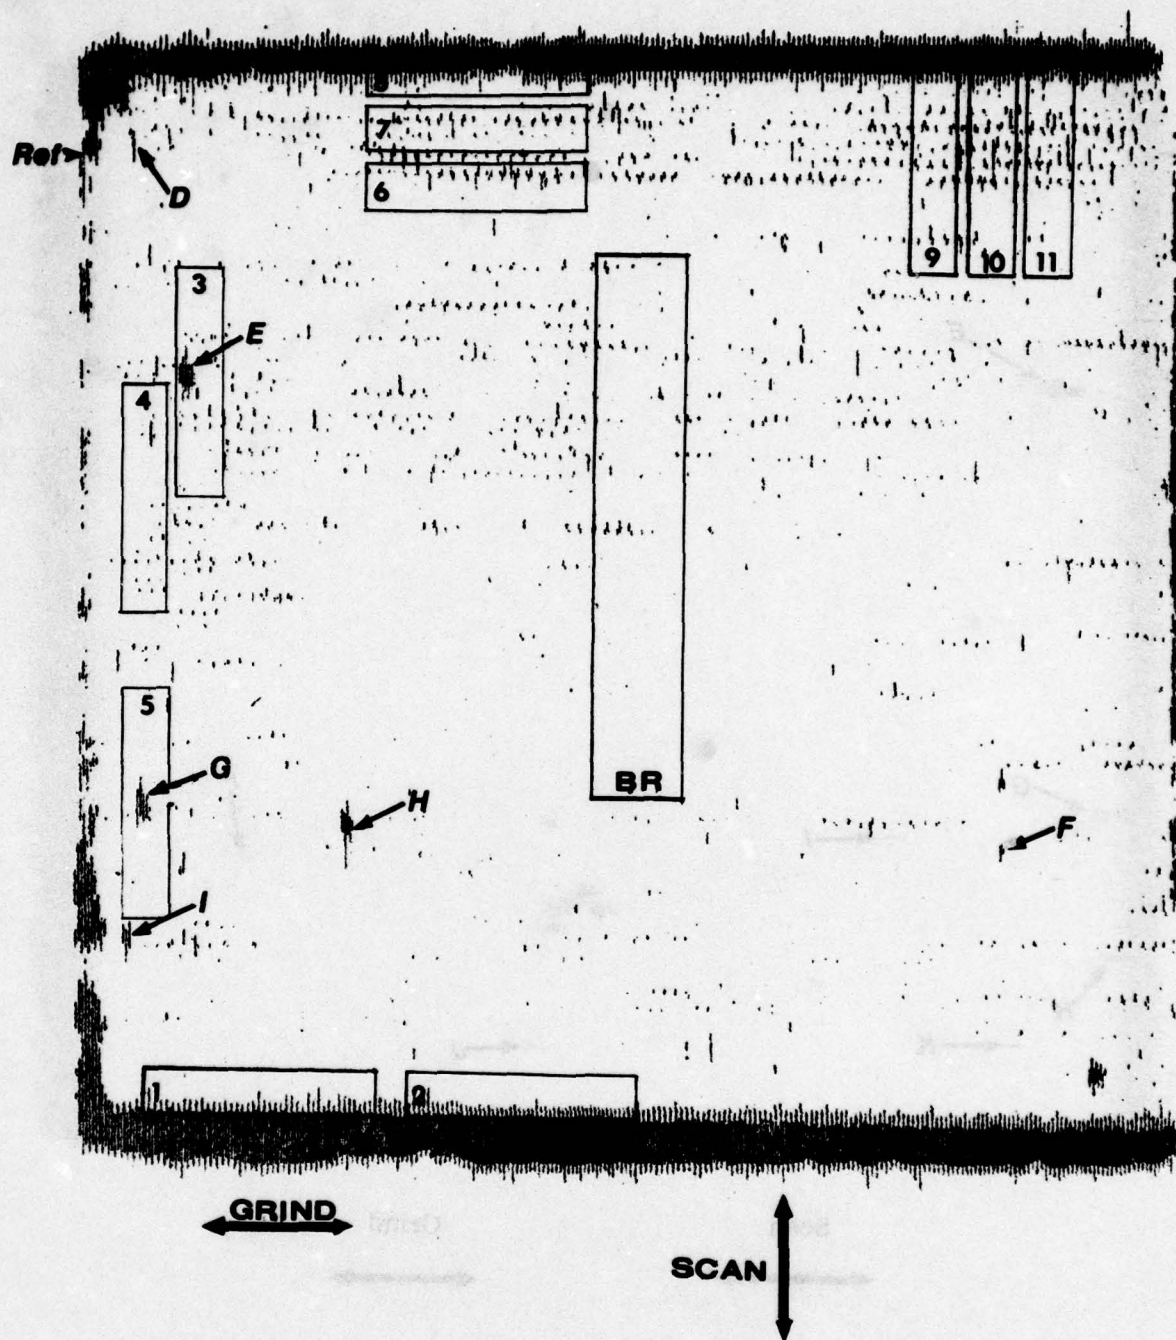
C-scan Recording of 45 MHz, 18° Surface Wave Inspection of Bottom Surface of Billet of Ceralloy 147A HPSN After Machining (Scan Perpendicular to Grinding Direction).
